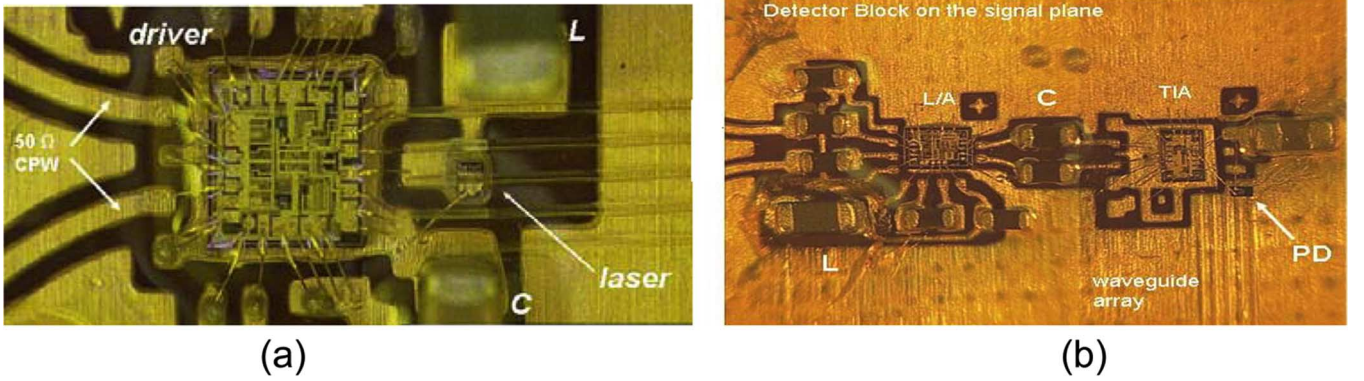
Assembled (a) transmitter block and (b) a receiver block on FR4 board.
